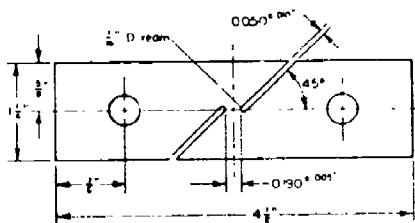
SHEET SHEAR TEST SPECIMEN
